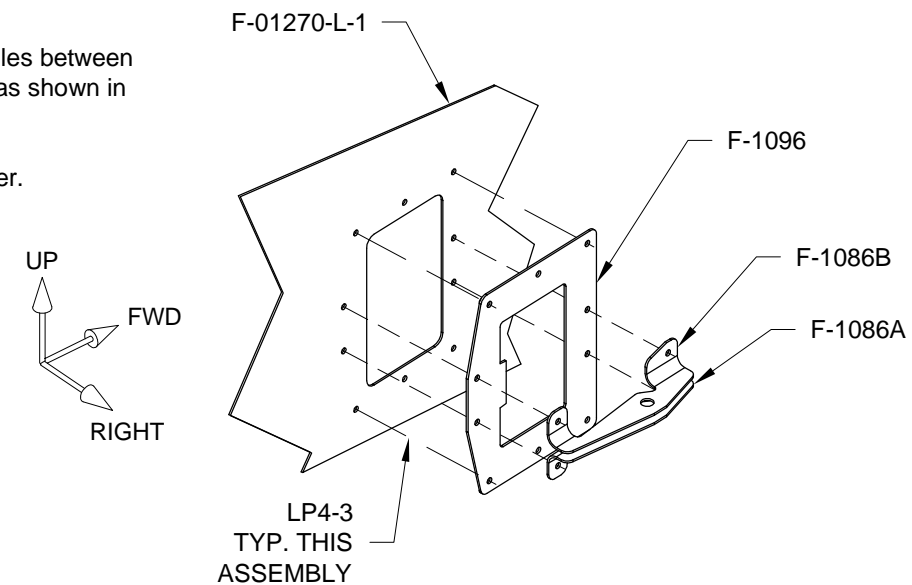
ASSEMBLING THE VENT DOUBLER AND BRACKETS
